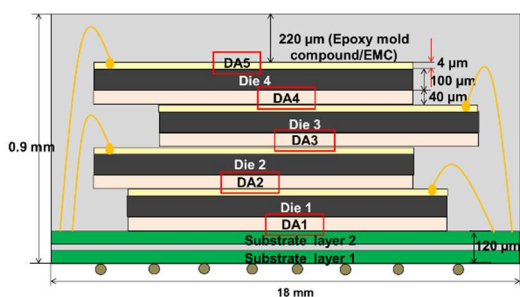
Schematic of the cross-section of a four-die stacked package [9]
